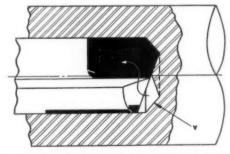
When the all-depth drill approaches a diameter of $2\frac{1}{2}$ inches, it is necessary to break the broad chip which comes from both the 20° and the 42° cutting angles. Steps ground in the cutting edges will do this effectively.
